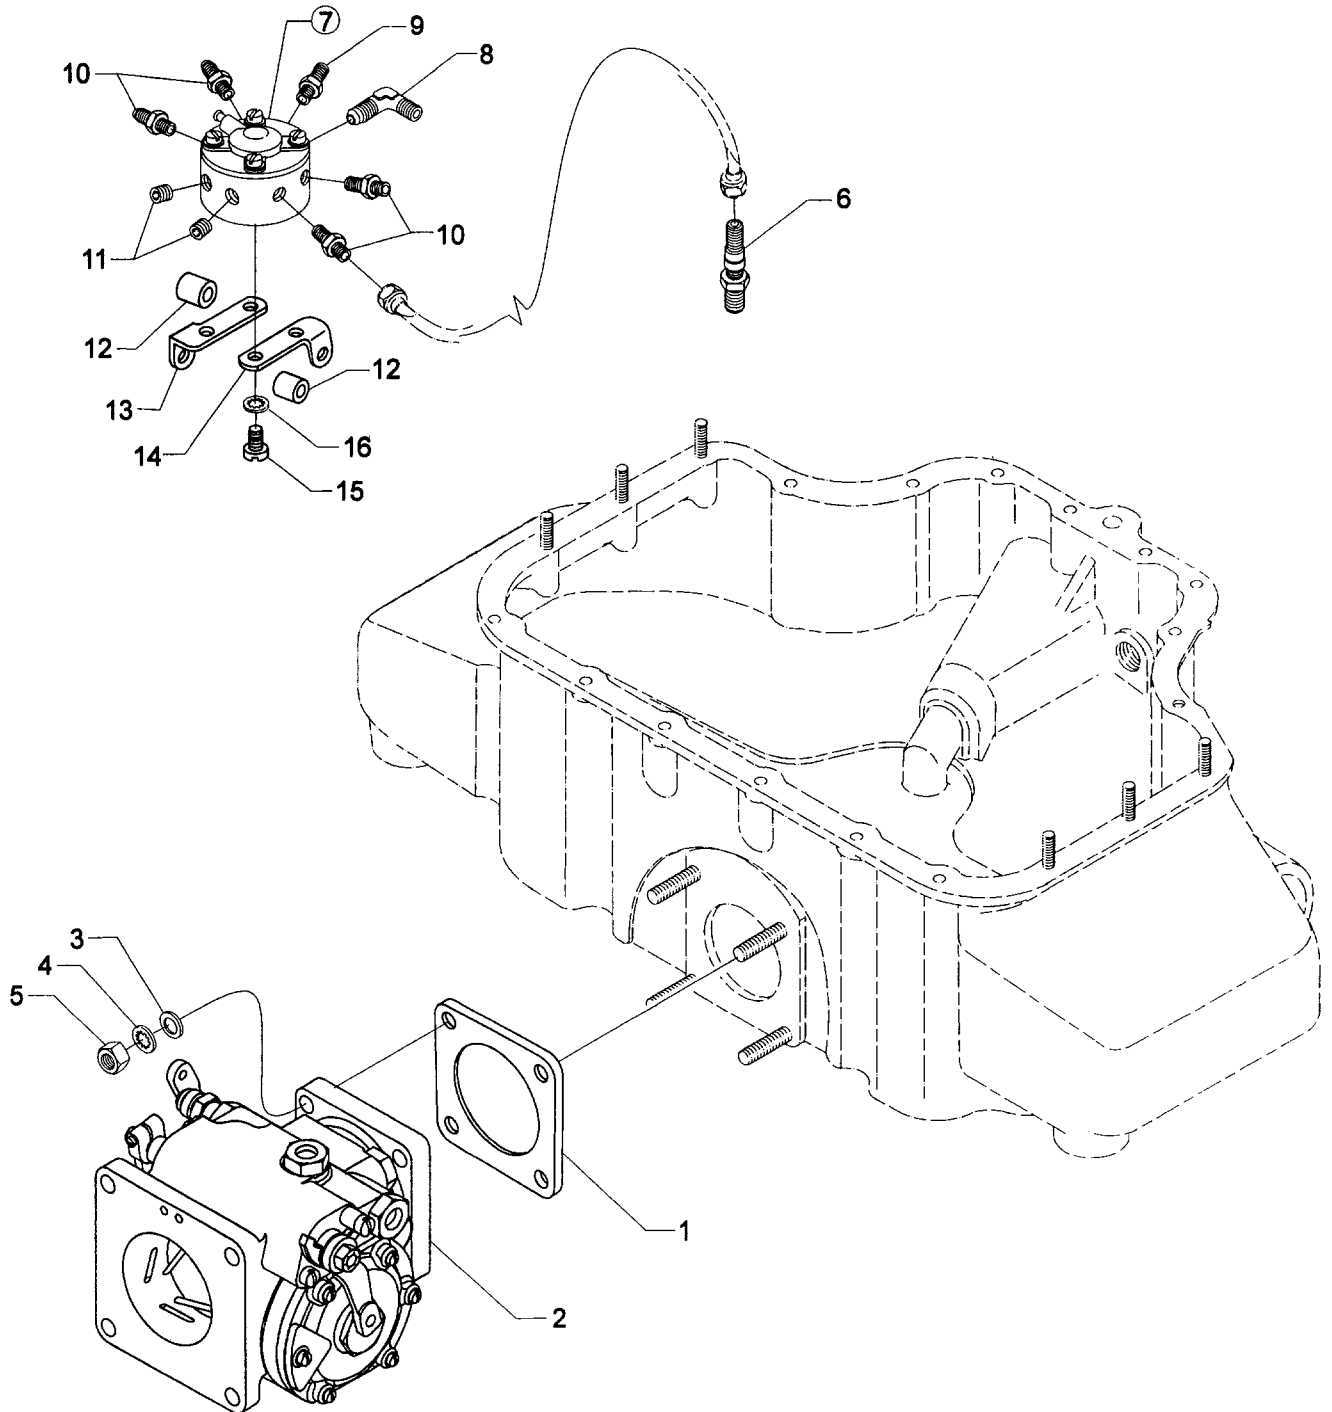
FUEL INJECTOR, FUEL MANIFOLD AND BRACKETS
